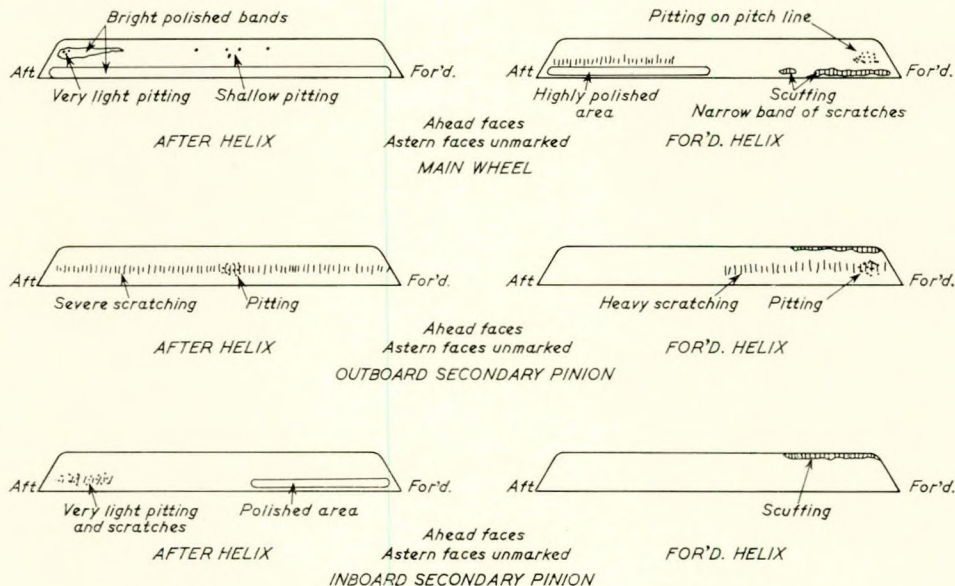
Y.100 gears—Condition of secondary gears after 7½ hours at full power
